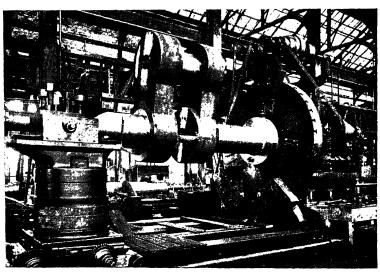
Machining a large crankshaft. Note counterbalance on face-plate to compensate for the weight of the crank. Later, by α offset on the faceplate, the crankpin will be finish-machined.
